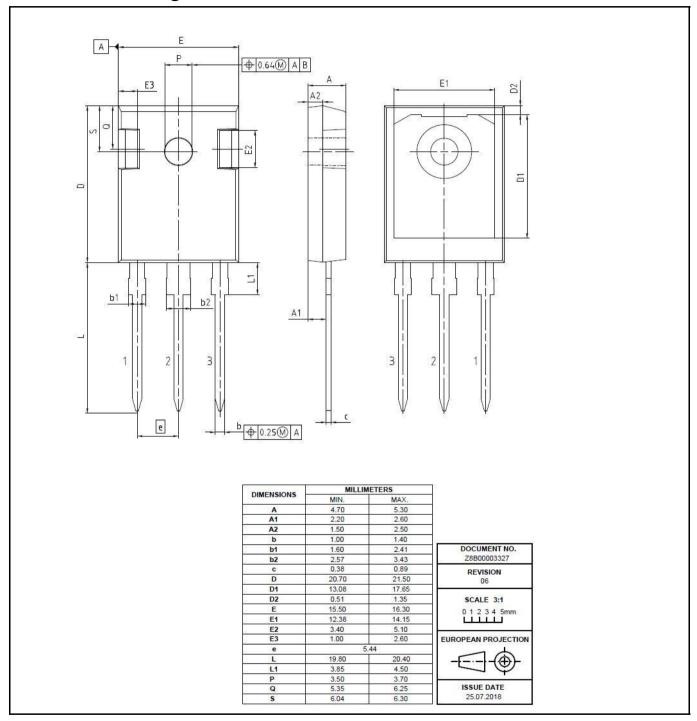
Package outline of PG-TO247-3-41 leaded (Dimensions in mm)
